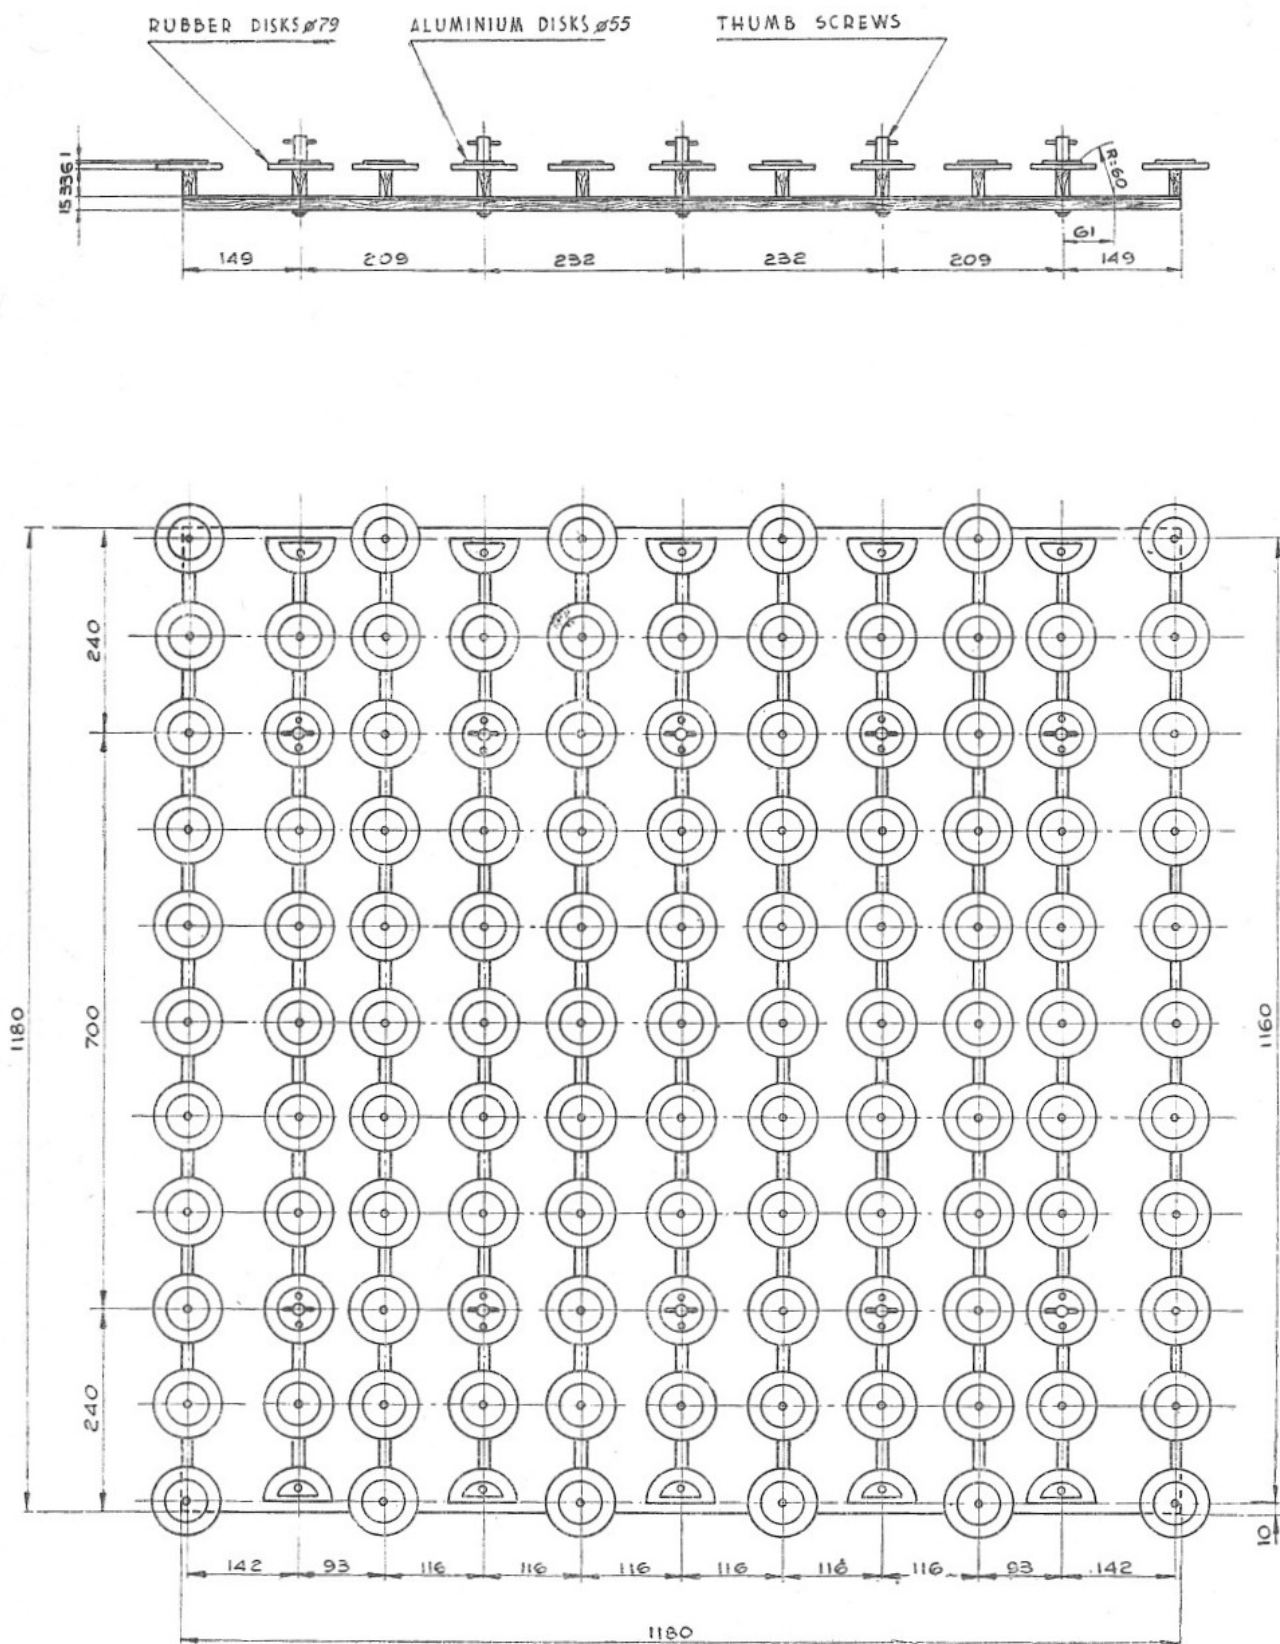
Wooden board with rubber disks for holding shake flasks.
